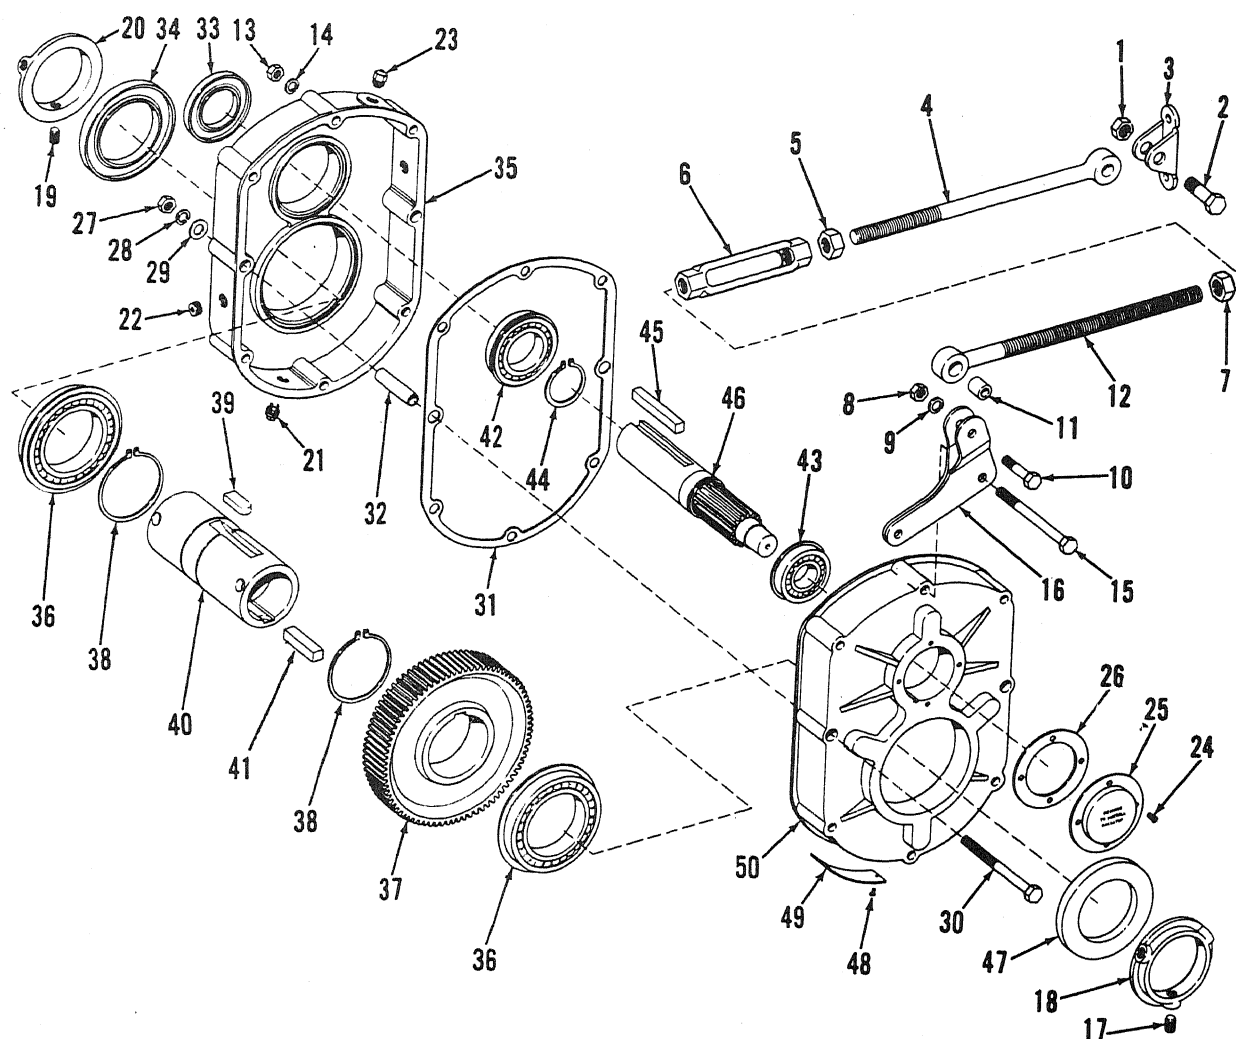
Undercrusher conveyor and elevating wheel drive, exploded view.
